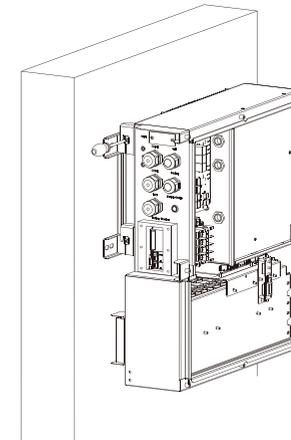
Fix Storion-SMILE-B3 to the Wall Bracket
